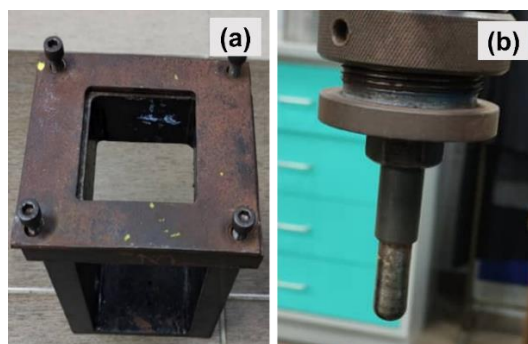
(a) Support fixture and (b) Hemispherical indenter
